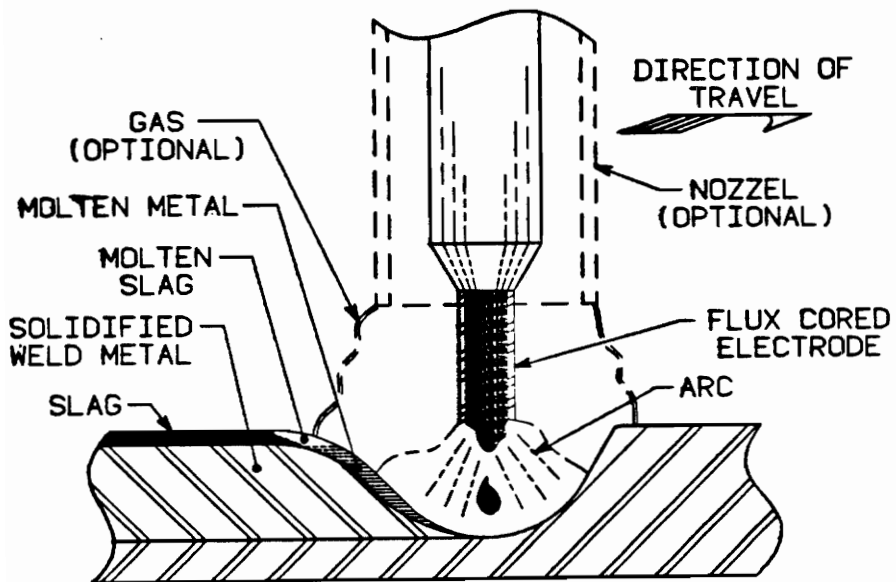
Flux-cored Arc Welding Process Diagram [1, p.155].
